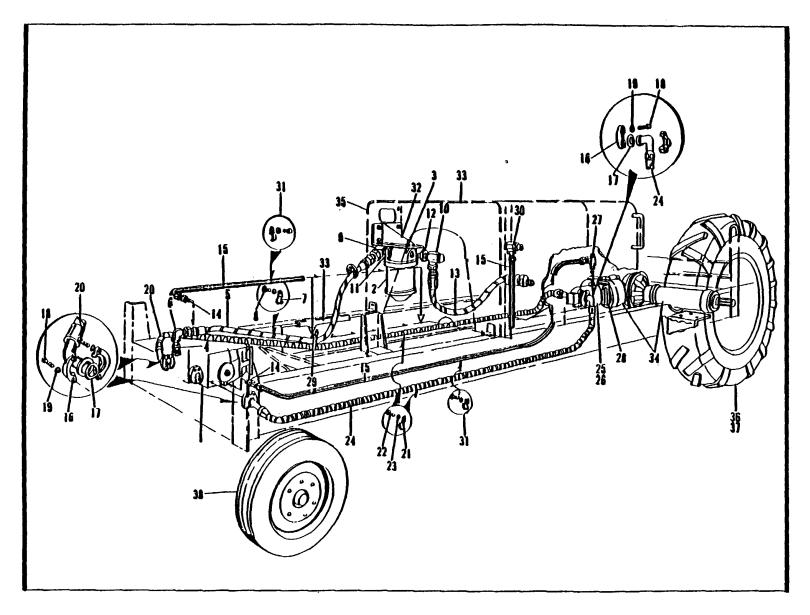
TRACTION DRIVE HYDRAULIC LINES
